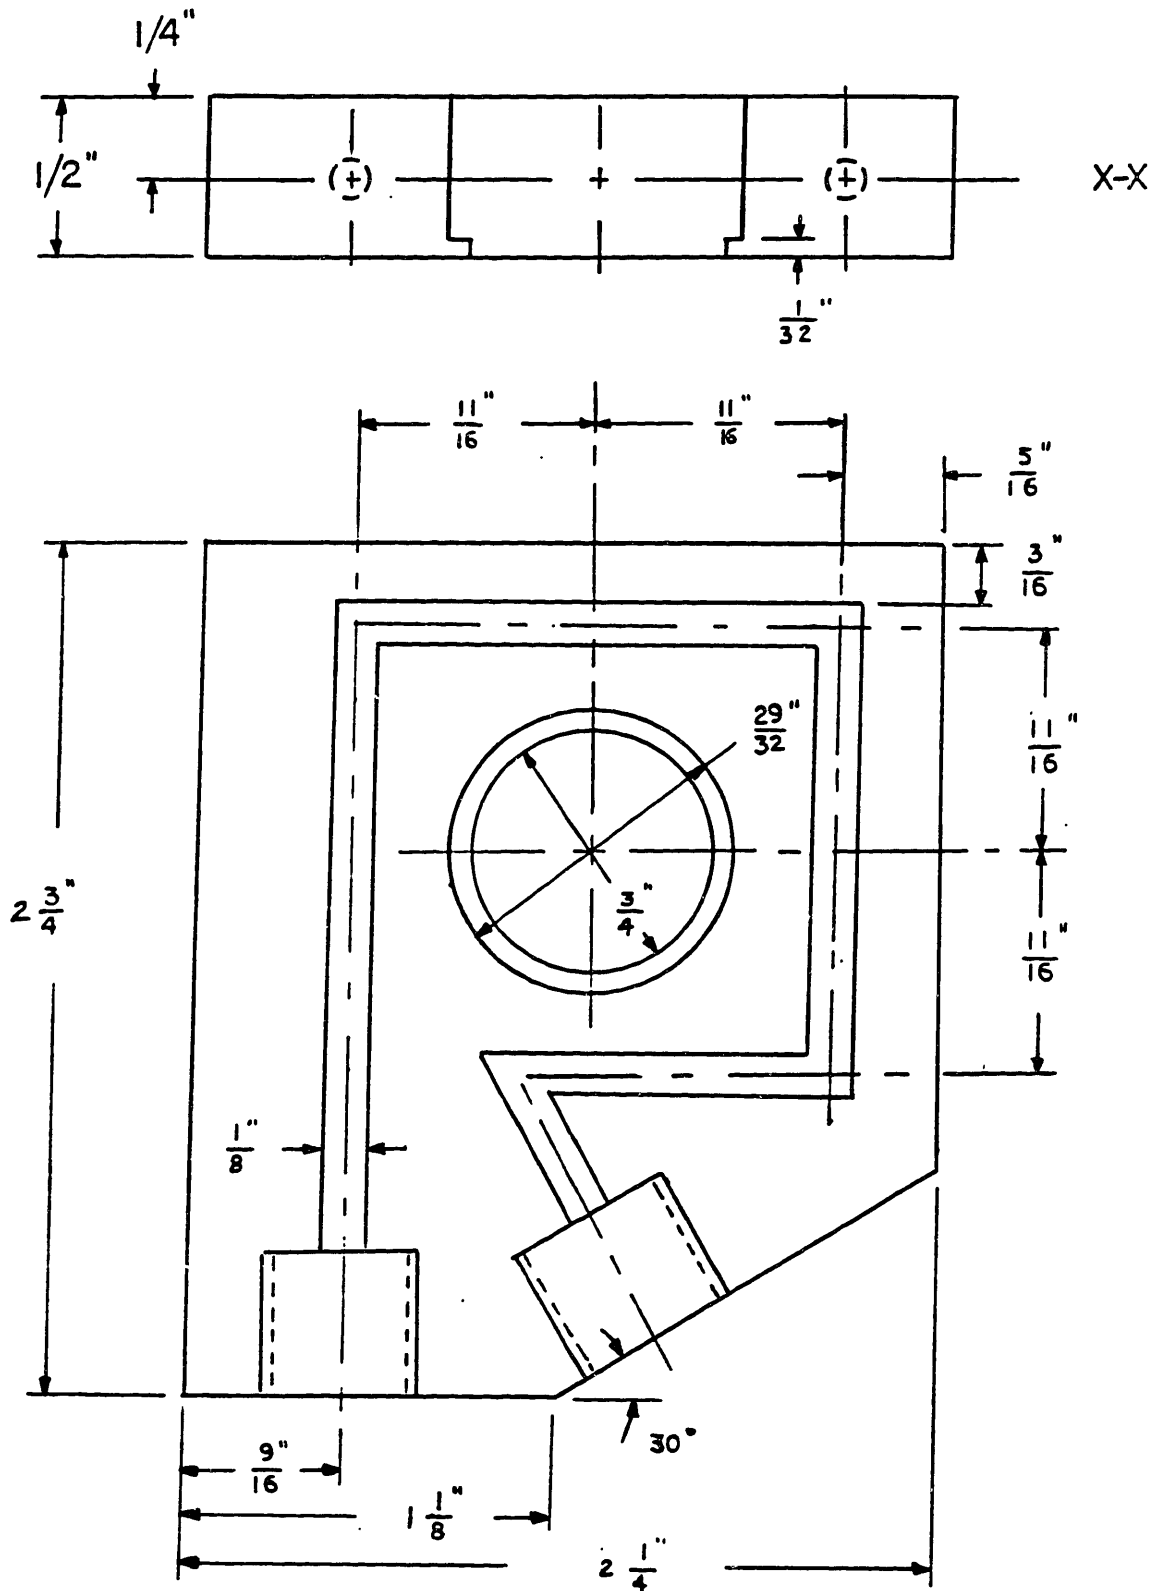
SCHEMATIC OF THE COPPER HOUSING FOR WELD PUDDLE TESTS
